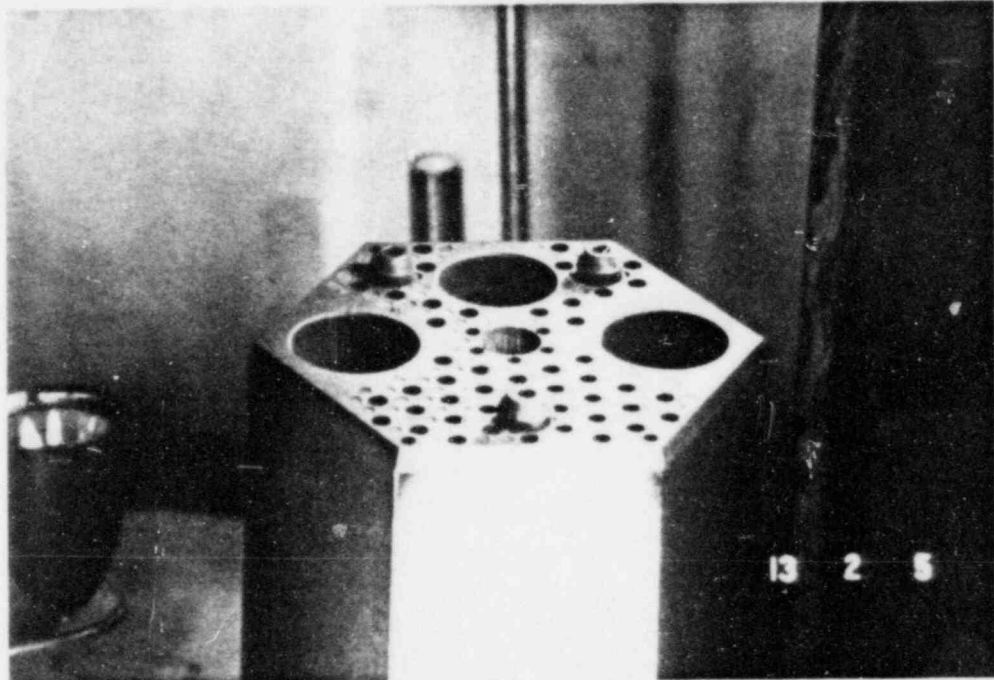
Bottom surface near the B dowel socket of element 2-1707 showing a missing chip between the dowel socket and the central coolant hole (319) on the B face edge
